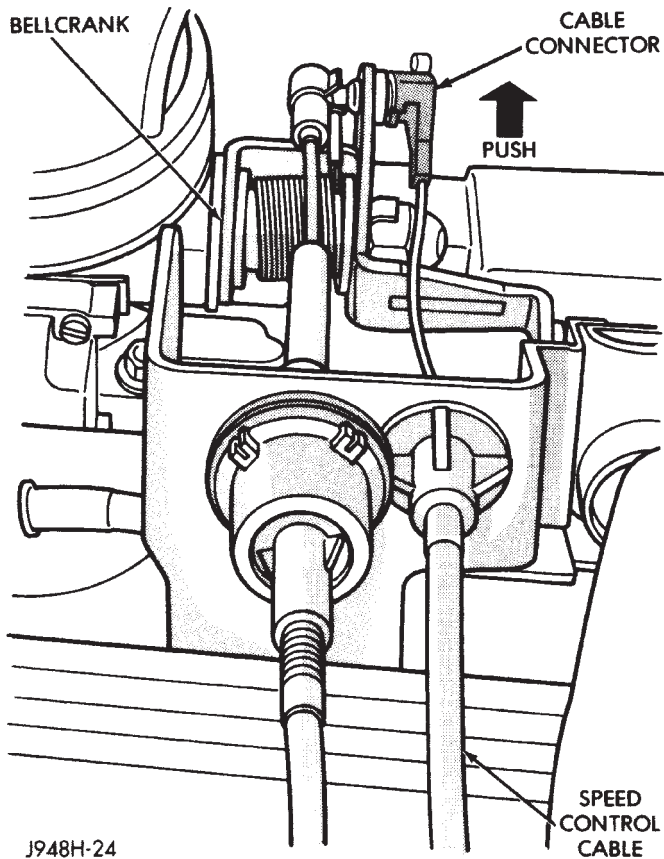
Remove Bellcrank Connector - 4.0L Engines
